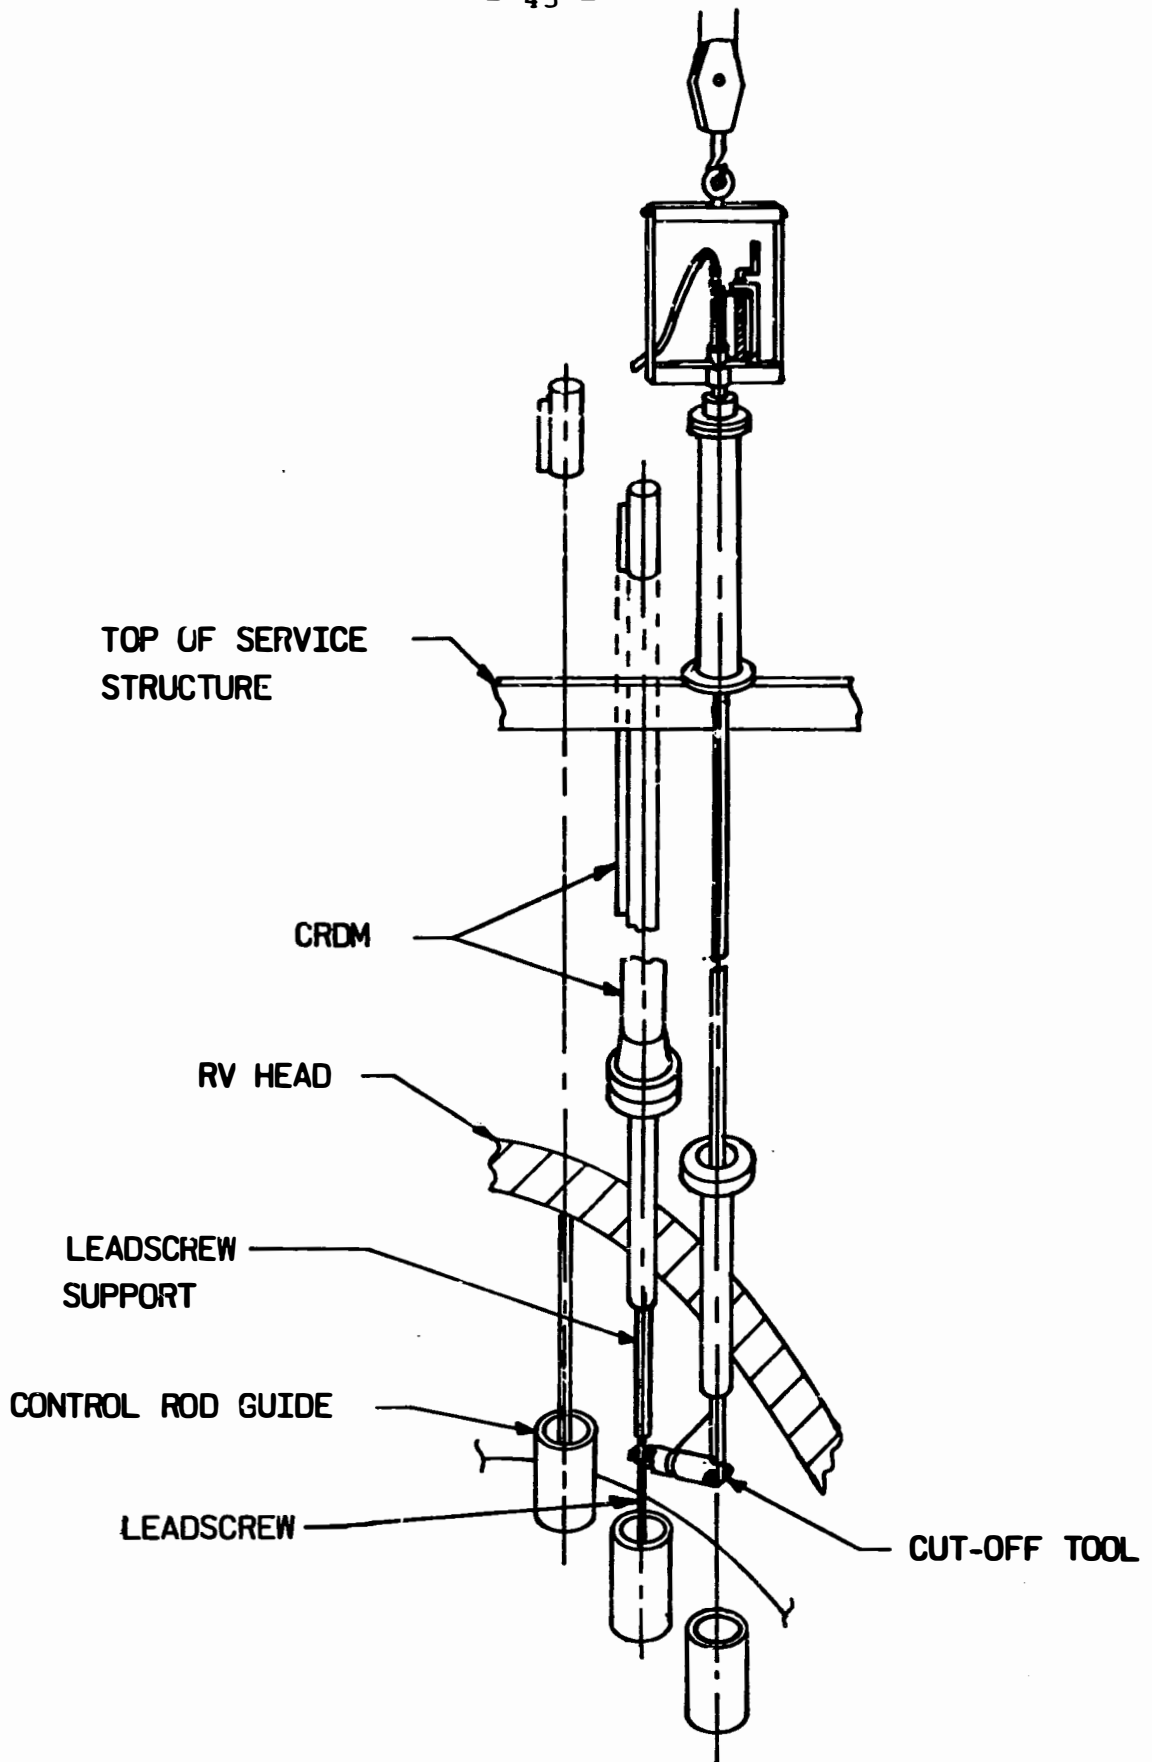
IN HEAD LEADSCREW CUTTER
